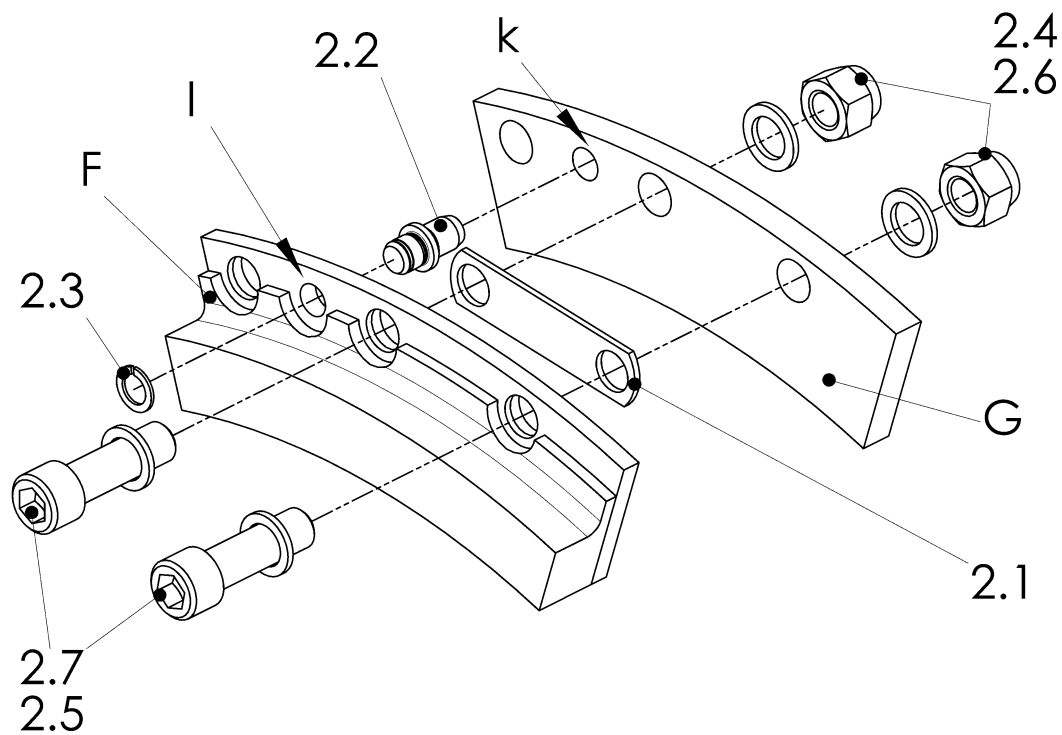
Connecting the rubber element assembly and the CX-flange assembly
